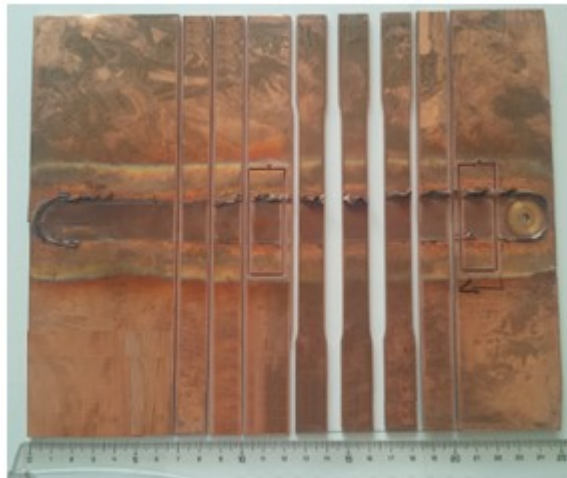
Photo with the samples cutted from the resulting welded joint
